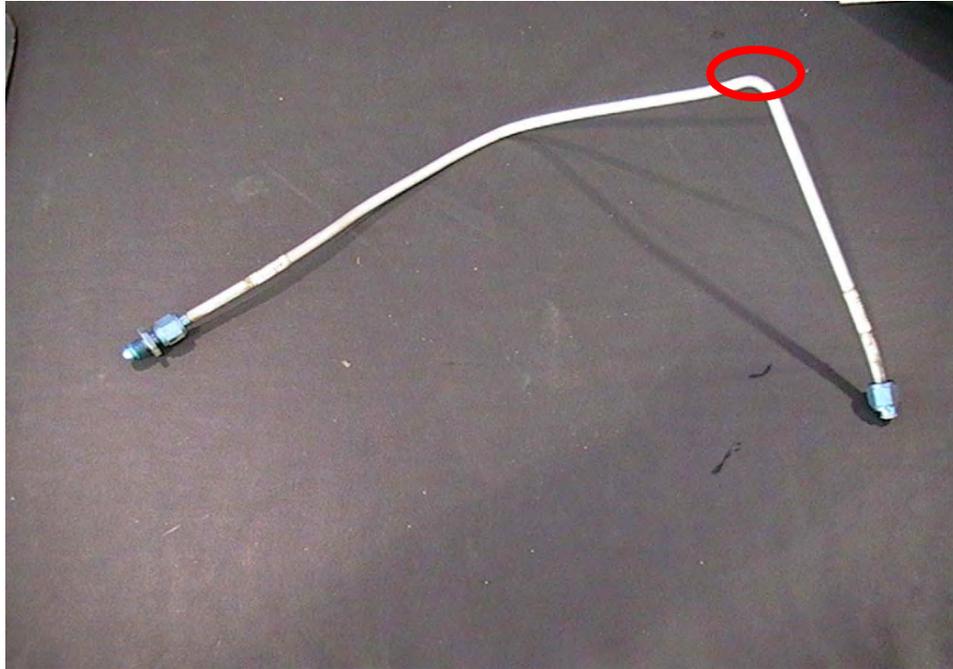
Location of Hole in the Left Wing Manifold Pressure Line
